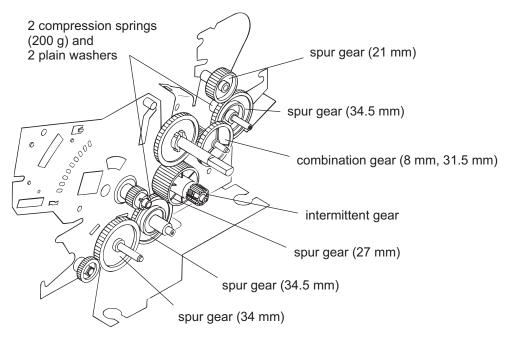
Engaging the Right Frame Assembly Gears (1 of 2)
